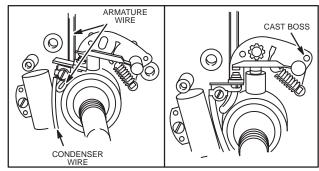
INSTALLING STYLE II BREAKER POINTS
